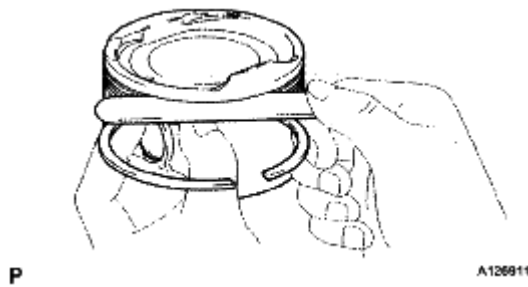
View Of Clearance Between Piston Ring And Ring Groove
